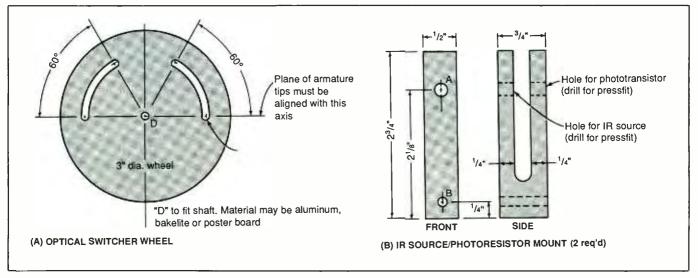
Fabrication details for optical wheel (A) and IR source/receptor yoke mounts (B).
